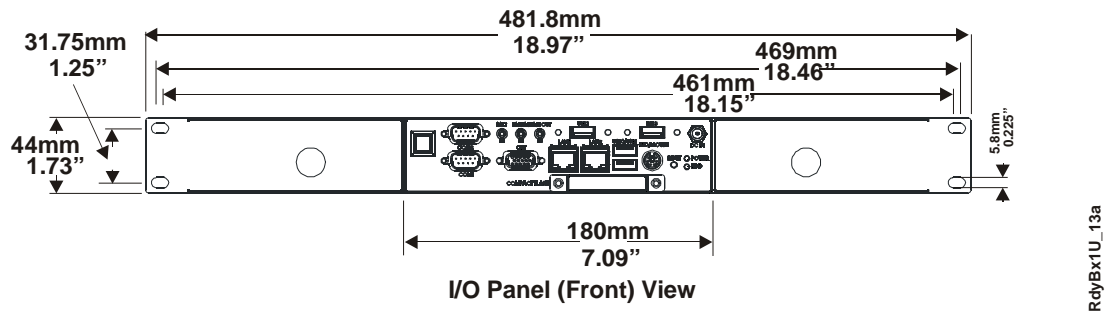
Optional Rack-Mounting Dimensions (Front View)
